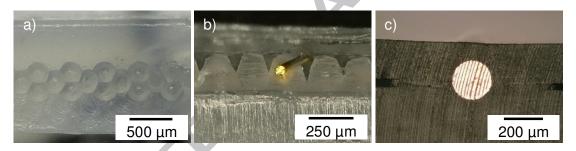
Top view (a) and cut through (b) specially shaped energy directors for ultrasonically welding thin metal wires between polymer layers, and cut through a thicker copper wire after welding (c).
